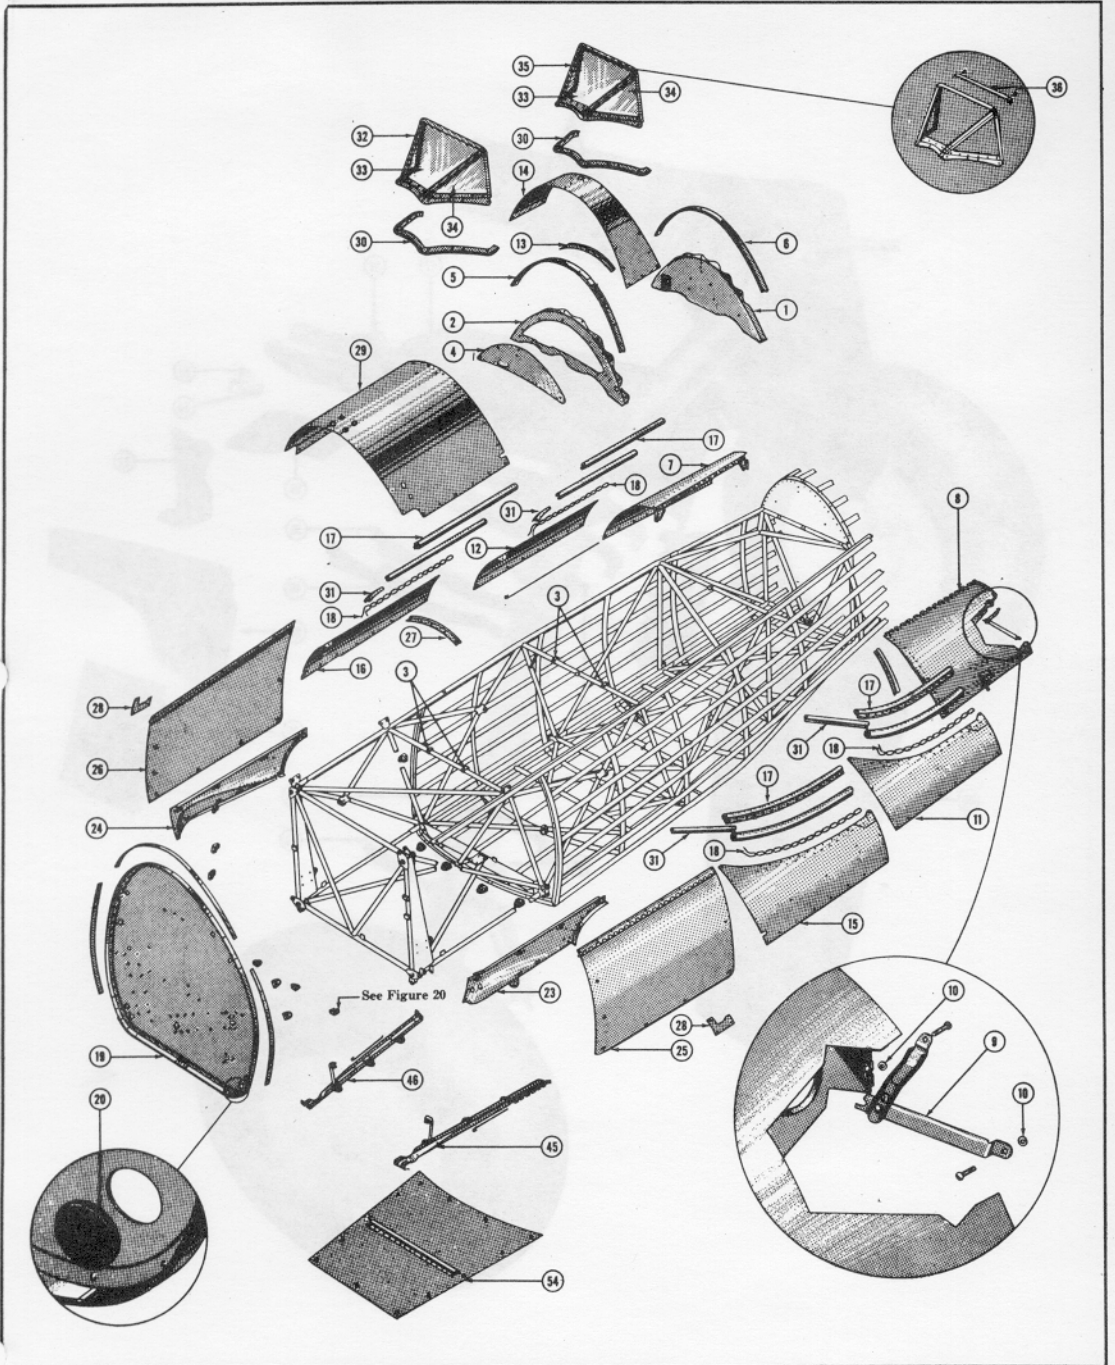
Fuselage Cowl Installation (Sheet 1 of 2 sheets)
